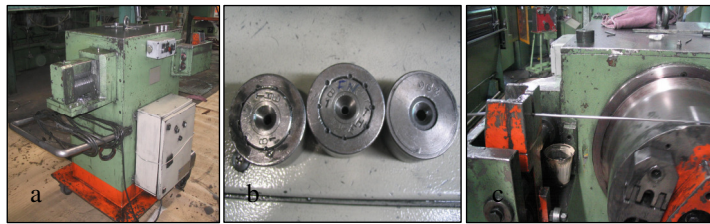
Scheme showing the obtainment of the utilized profile: (a) Motorized pointer with puller of wires for nonferrous metals; (b) diamond wire gages utilized and (c) drawing moment.
